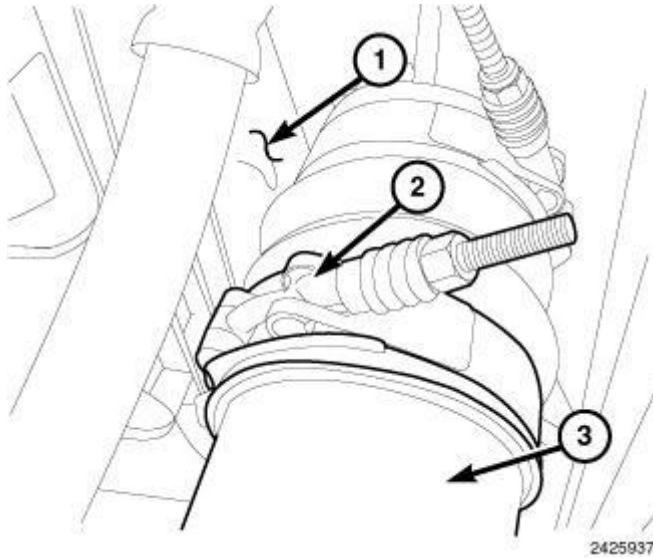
Identifying Clamp, Charge Inlet Tube & Charge Air Cooler (CAC)
